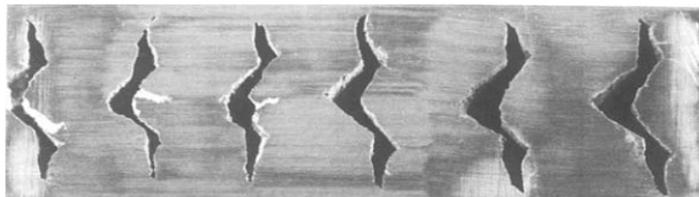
Cracks formed in a molybdenum bar during rolling under high conditions.
